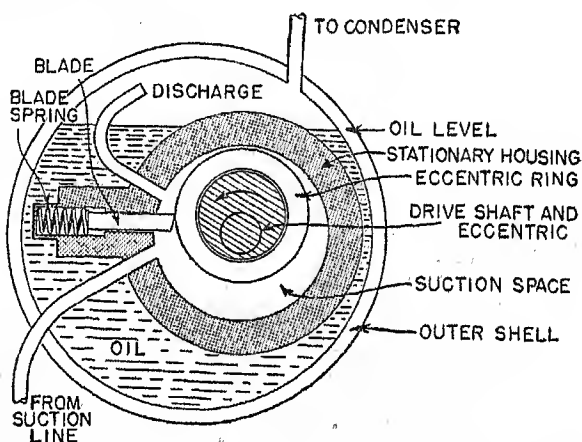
A Rotary Compressor with a Single Sliding Blade or Vane.
